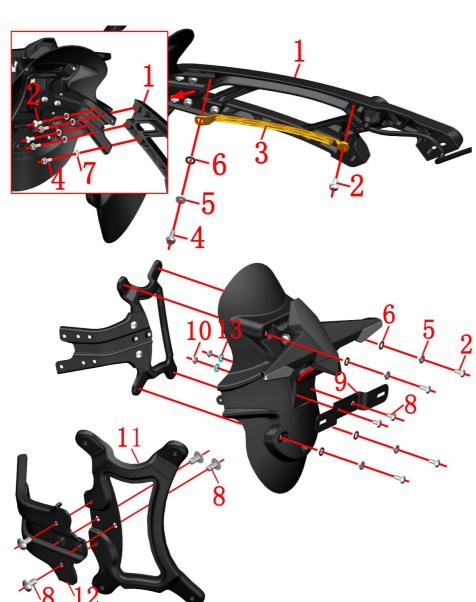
Rear wheel, swinging arm assembly		Rear auxiliary mud plate component 2	CHK ADJ	(4)
